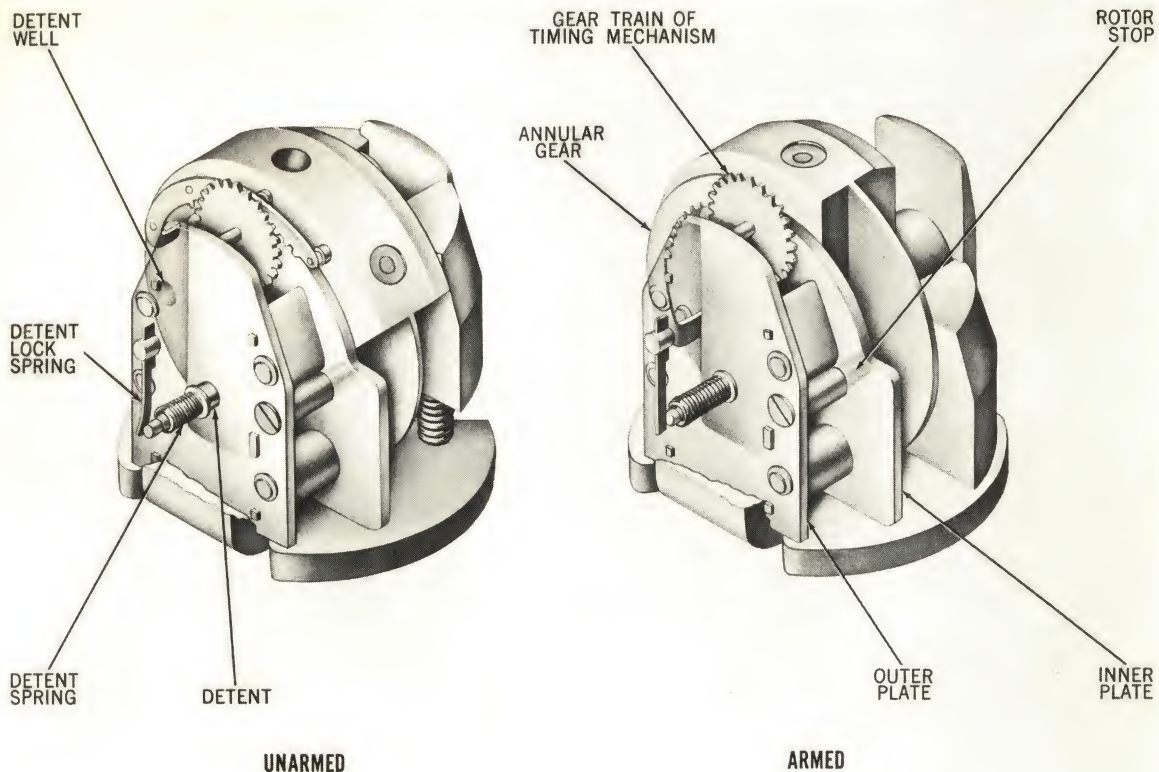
Rotor Arming Mechanism Removed from Fuze, Unarmed and Armed Positions, View from Left.
